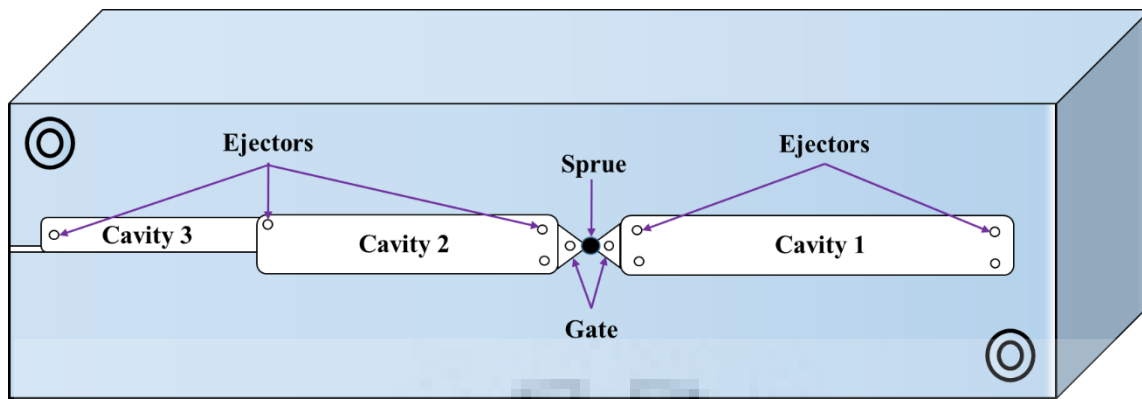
10 Schematic of mold cavities of injection molding machine
